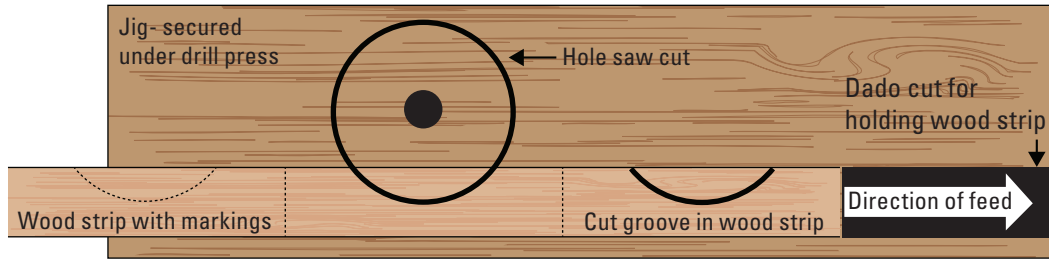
Drill press method jig for making tube stabilizer grooves with wood strip feed.
